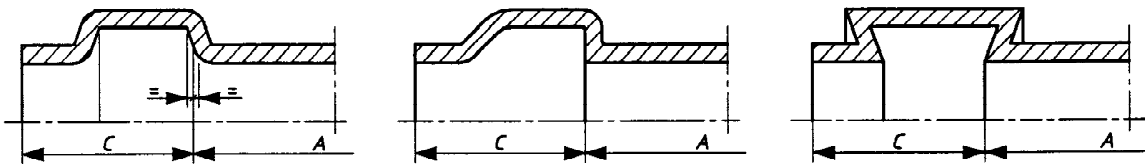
Typical groove designs for elastomeric ring seal sockets
